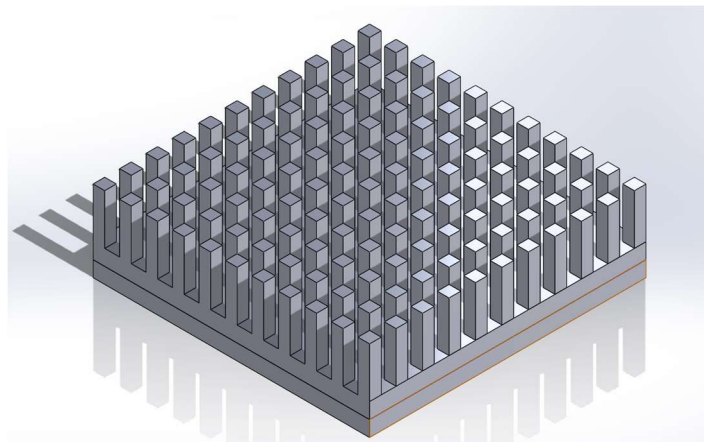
Heat sink and silicone chip assembly in SolidWorks.
